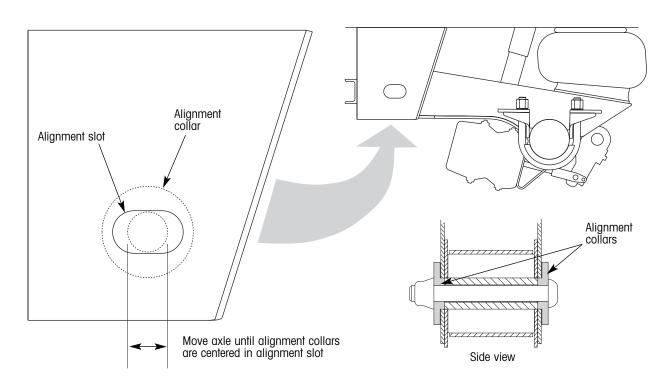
Axle positioning on the welded-collar type frame bracket when major adjustment (both axle ends) is necessary
